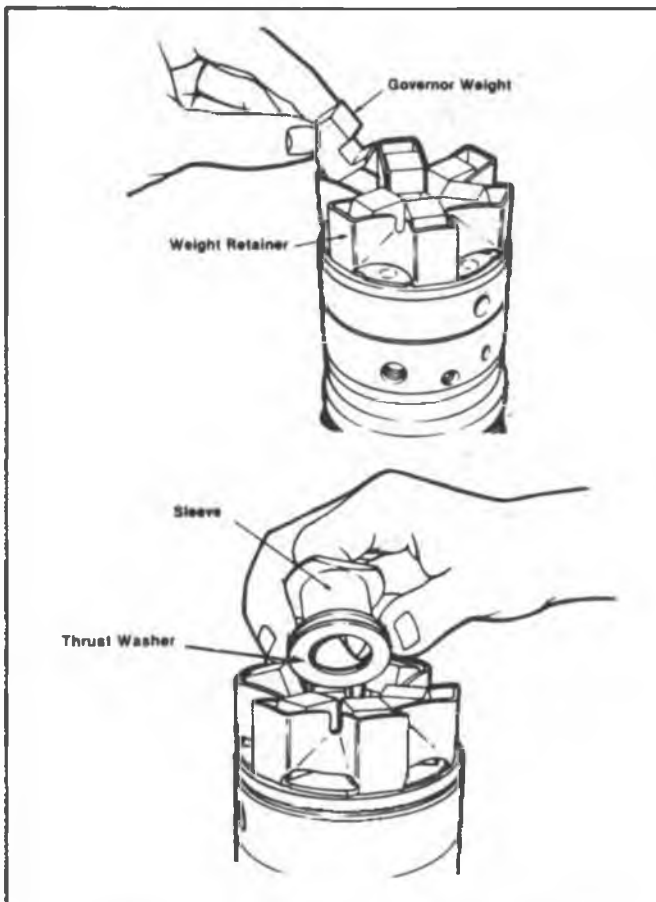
Governor Weights, Thrust Washer and Sleeve
